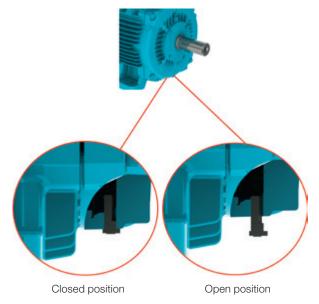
Detail of the rubber drain plug mounted in closed and open position
